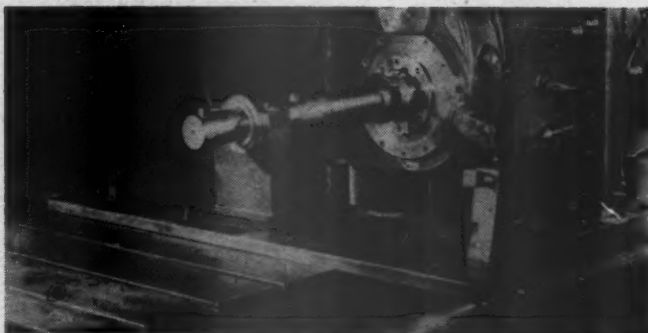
Holding fixture for milling and boring valve gear frame with one setup
